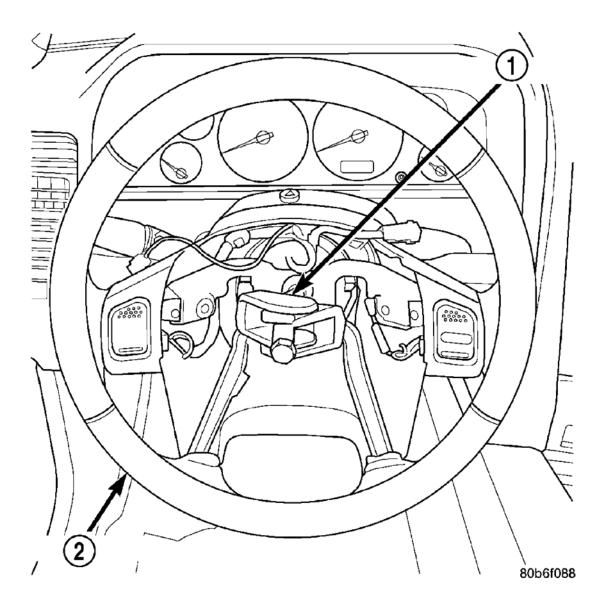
Steering Wheel Puller Courtesy of CHRYSLER LLC
